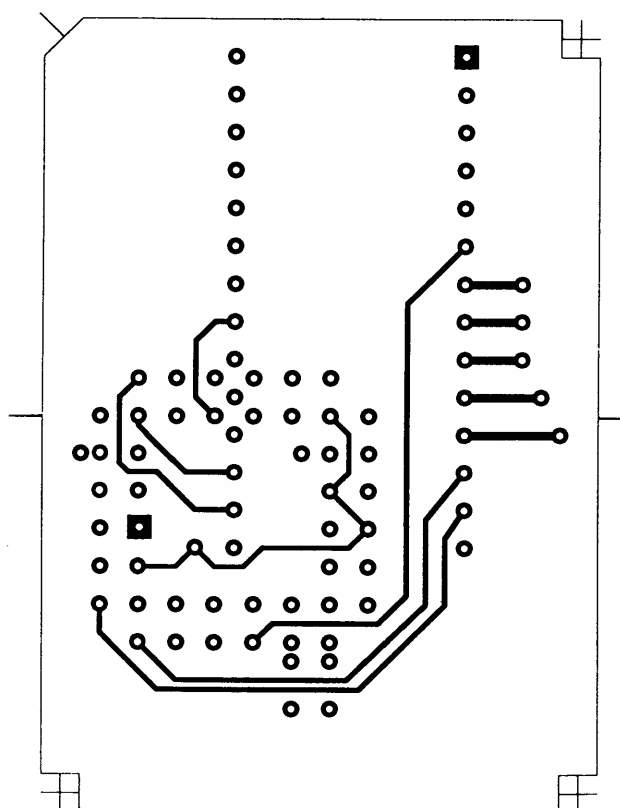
PCB Solder Side Layout Pattern Using Socket Mounted PLCC
